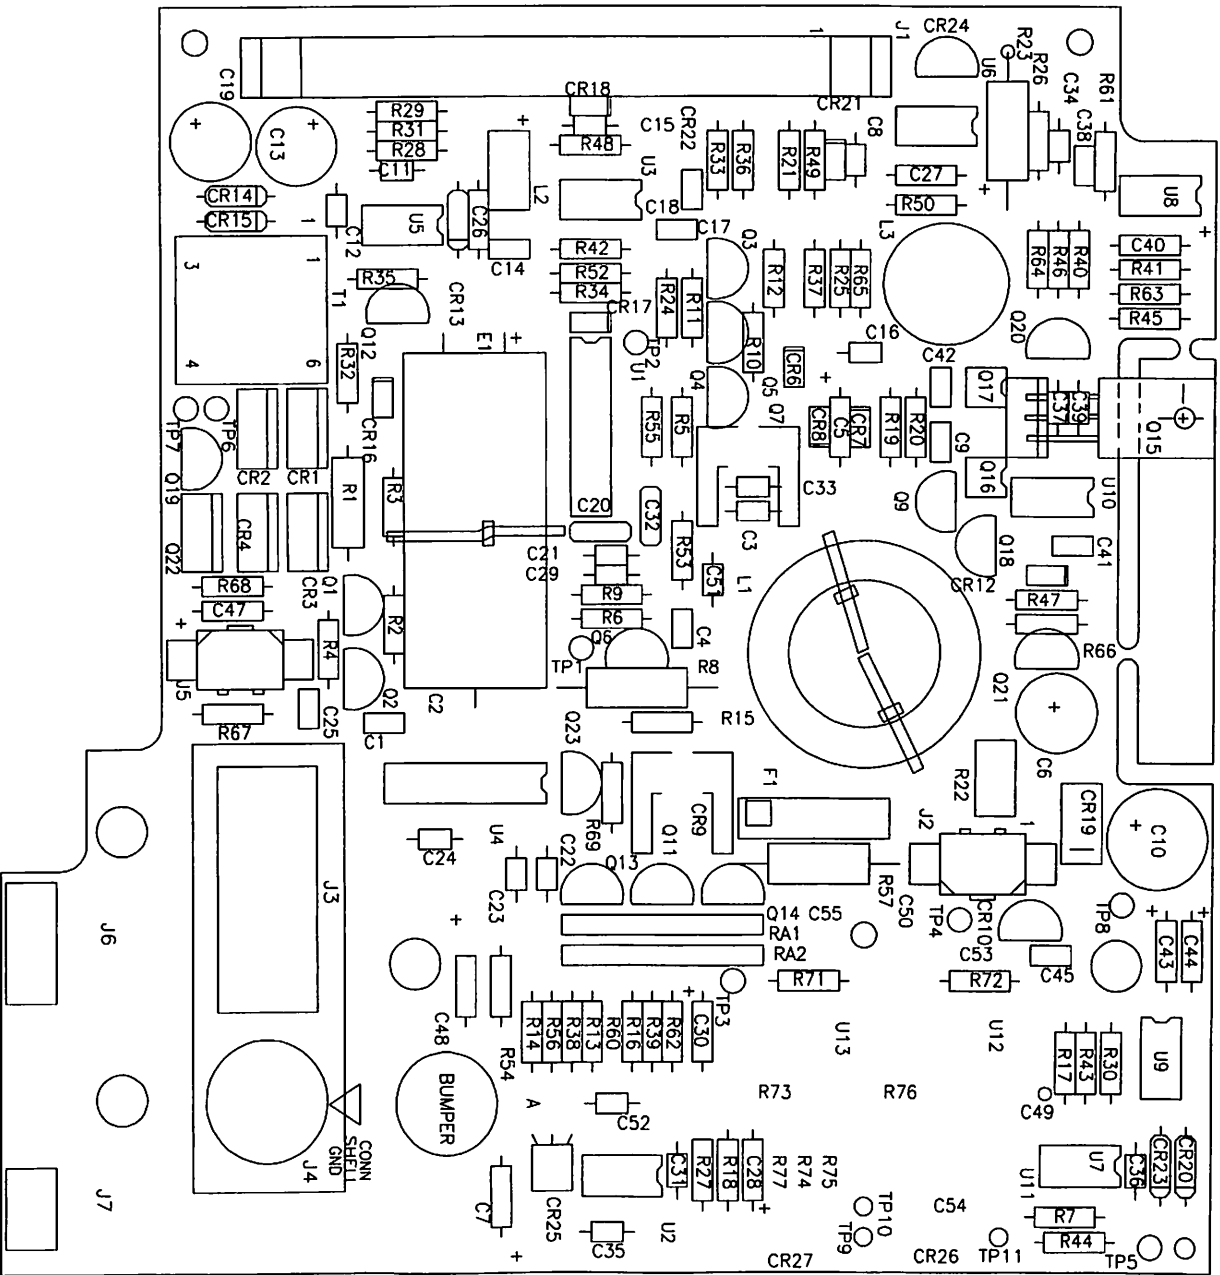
Parts Identification Power Supply CCA [V7.xx]
